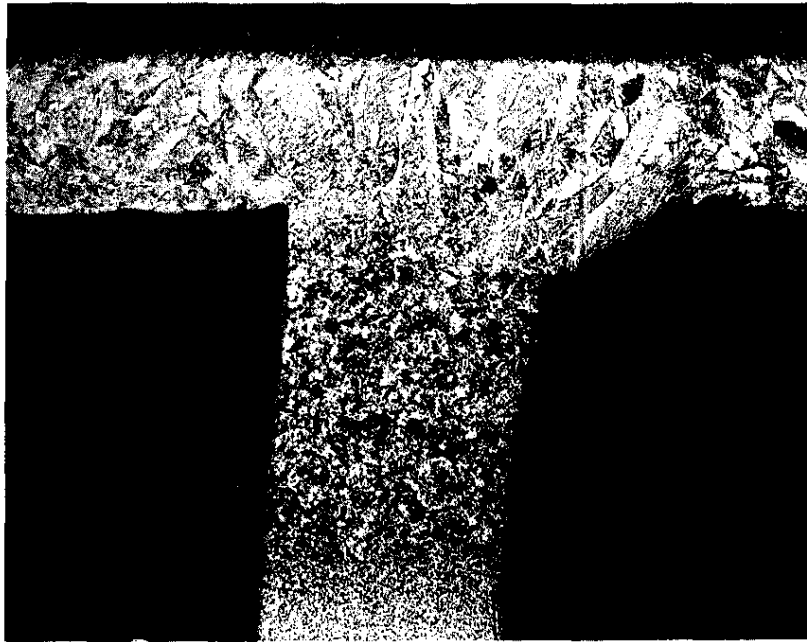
CROSS SECTION OF WELD BETWEEN RIB AND HOUSING TUBE
